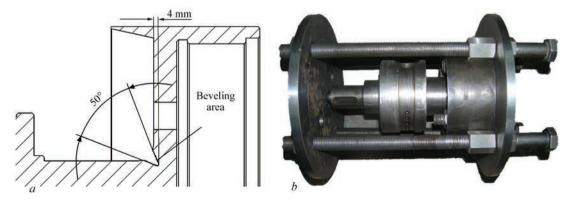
Scheme of beveling the edges of regulator shaft fillet transition (a) and fixture for realization of the technology of shaft welding (b)
